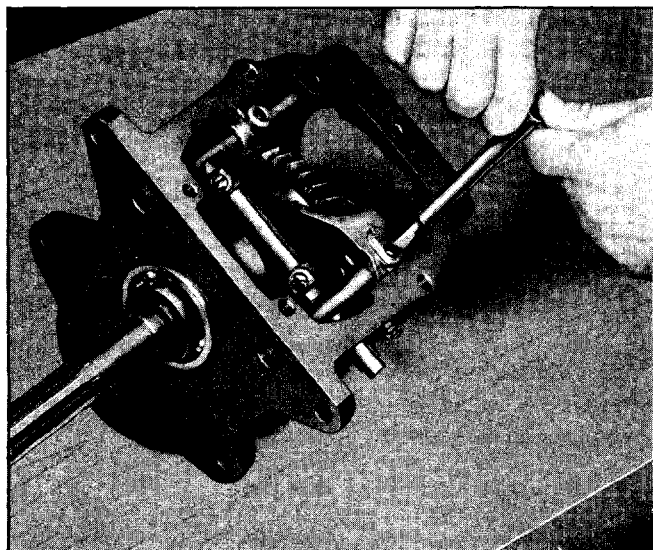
Removing Shift Fork Lock Screws with Tool J-2895
